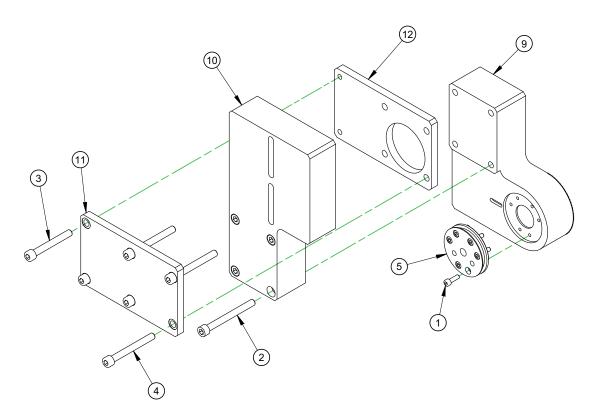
TURNING ARM ASSEMBLY 38" (965 MM) PARTS LIST (P/N 80304)
